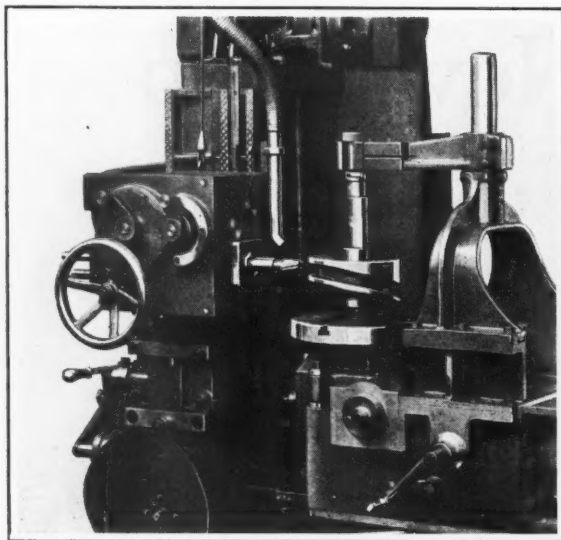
The Spindle of the Rowbottom Cam Machine is Indexed to a Vertical Position for Side Cams
